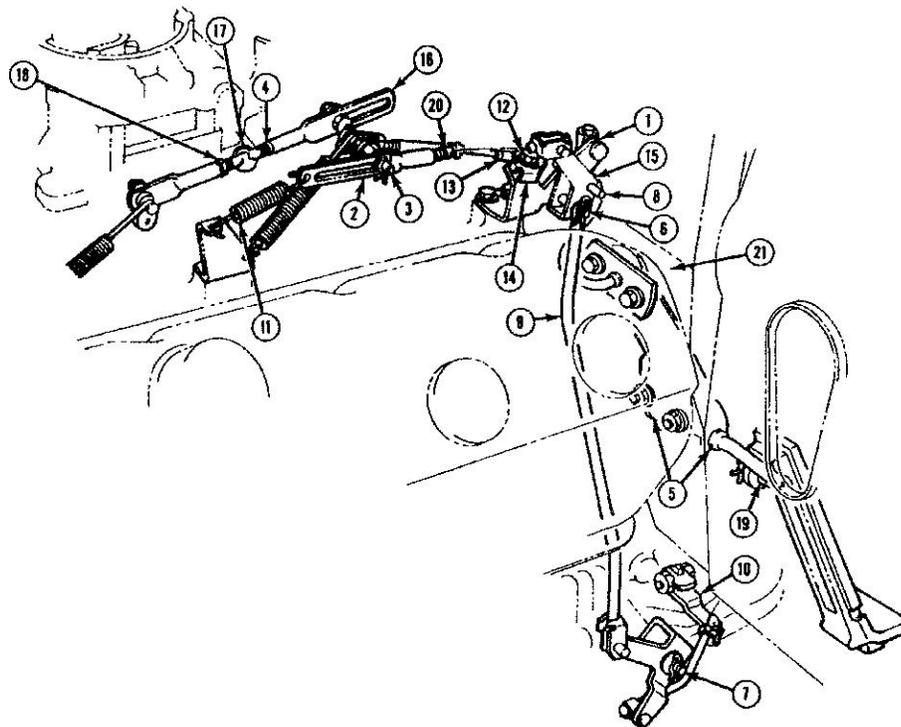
Throttle Rod Adjustment (With 426 Cu. In. Eng.)
